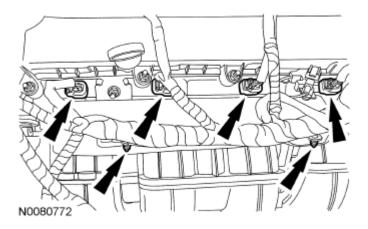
Locating Fuel Rail Insulator Courtesy of FORD MOTOR CO.
